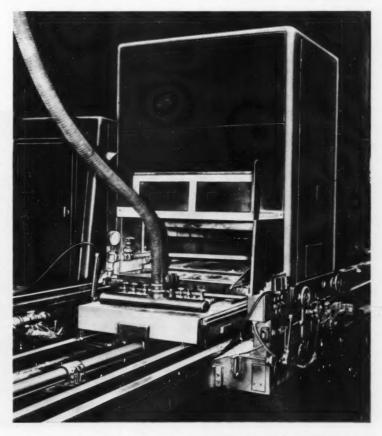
Wide-belt abrasive machine adapted for new method of producing aircraft skins announced by Carborundum Co. and Bell Aircraft Corporation Abrasive belt has been removed to show rubber-faced contact roll.
